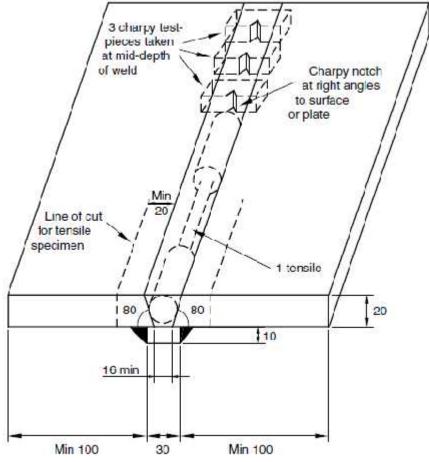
Deposited metal test assembly (All the dimensions are in mm, unless otherwise indicated.)
